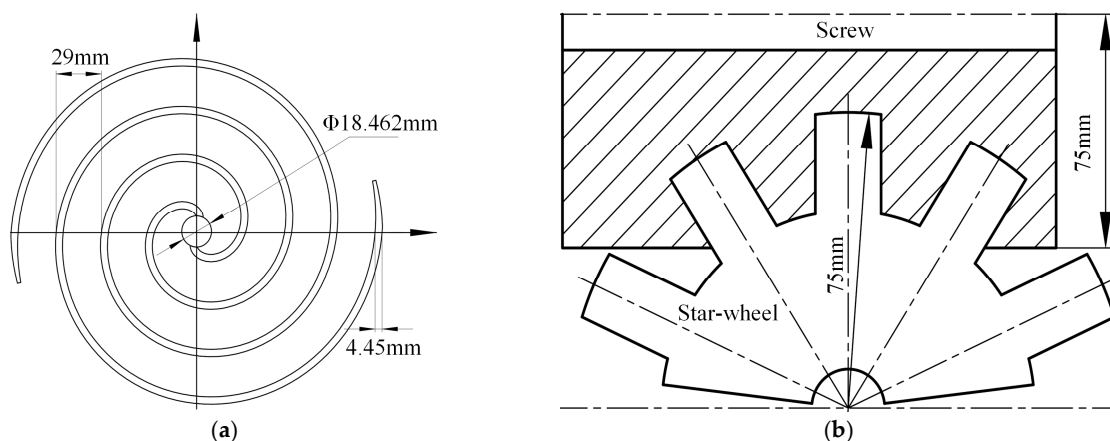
Compressor geometry: (a) scroll tooth profile; (b) CP-type single-screw compressor.
